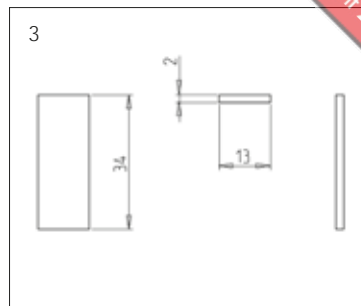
Design drawings of the test pieces for the static immersion test for examining the corrosion properties
